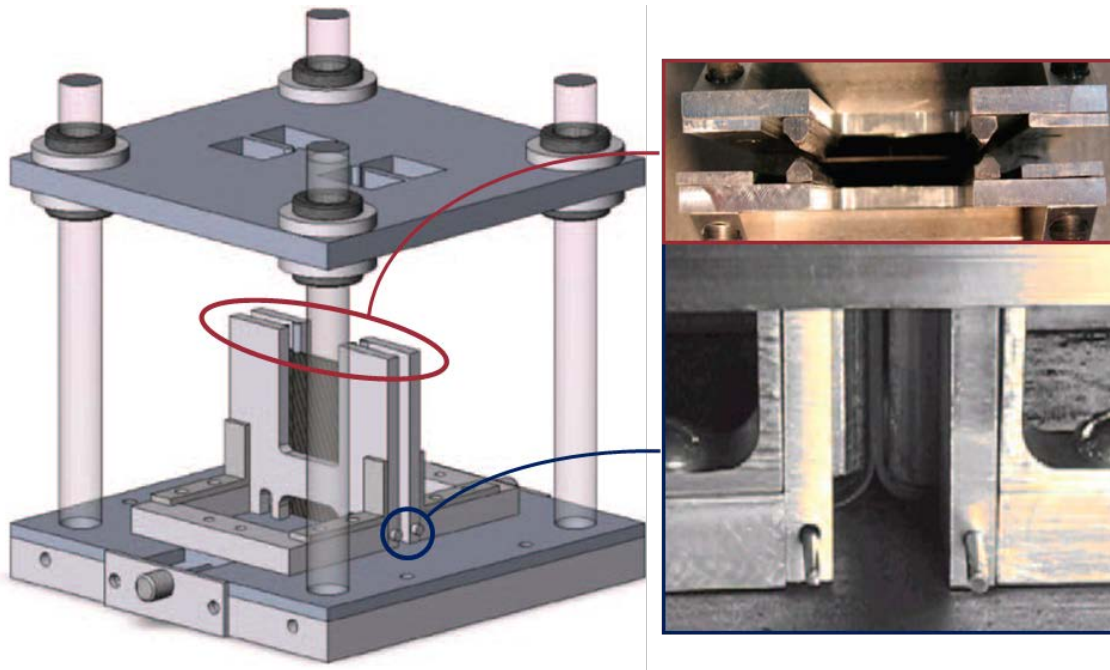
University of Washington flat crush coupon fixture highlighting the details of the knife-edge supports (top right) and unsupported height of the crush coupon (bottom right) [12]
